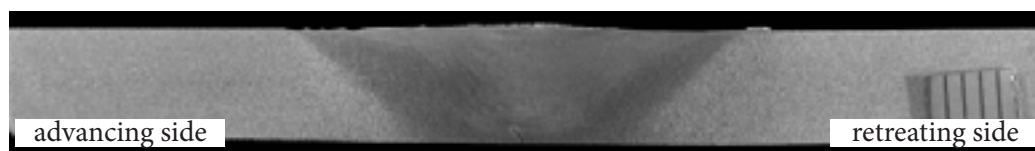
Macrostructure of the FSW weld made of aluminium alloy EN AW-6082; welding parameters $V_n = 1120$ rpm, $V_z = 1120$ mm/min; Triflute type tapered tool; etchant: Keller's reagent [8]
